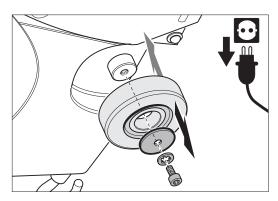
Remove the screw with the washers in the centre of the wheel and remove the lateral wheel. Replace in reverse sequence.
